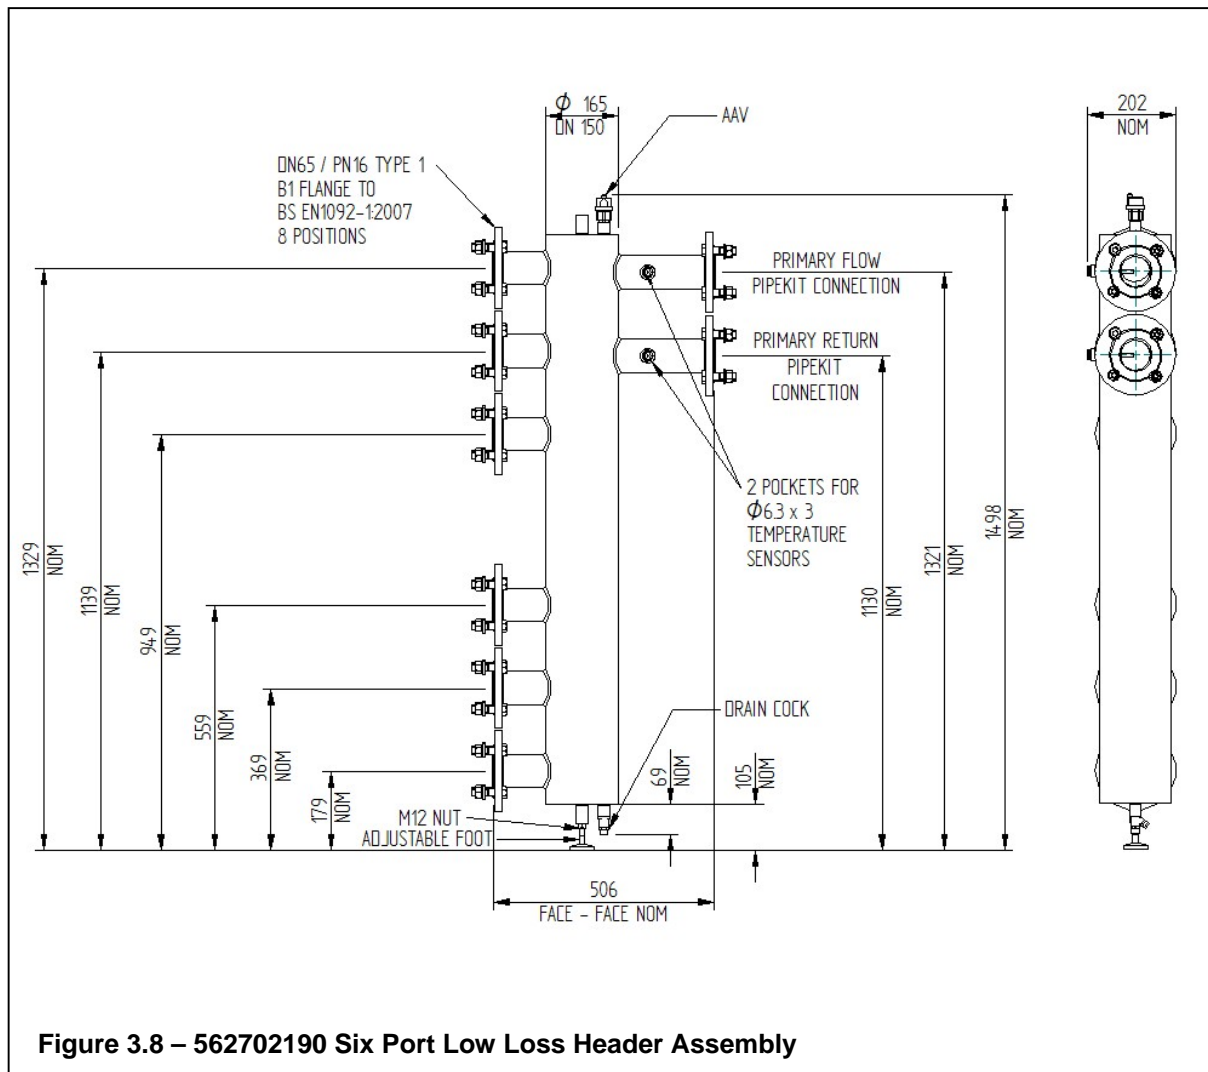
562702190 Six Port Low Loss Header Assembly
